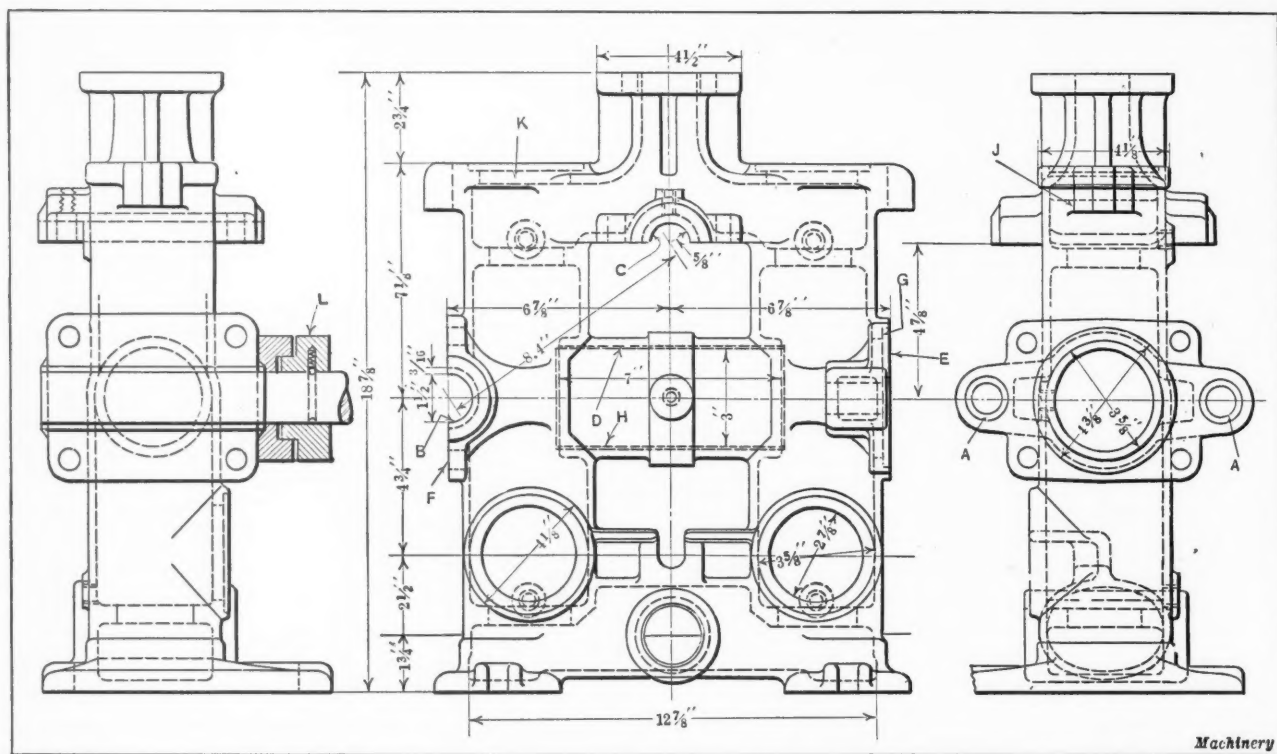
Detailed Views of Cylinder Casting for Double-acting Pump
